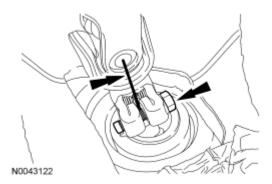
Locating Steering Column Shaft Index Mark And Bolt Courtesy of FORD MOTOR CO.
